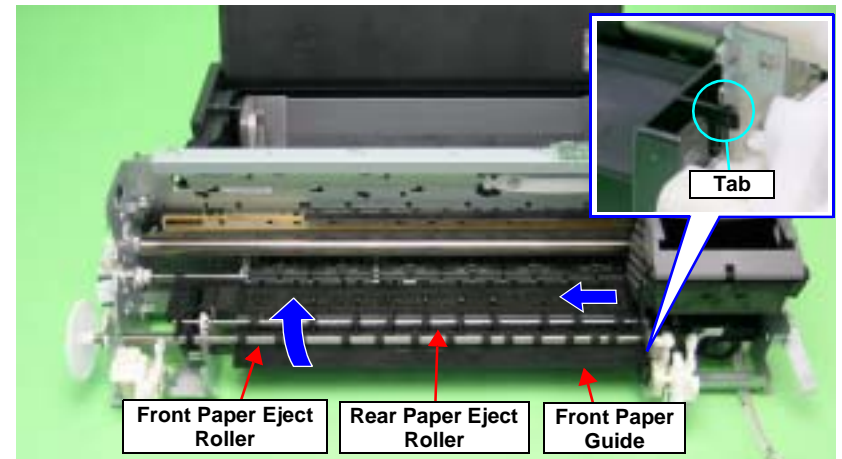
Removing the Front Paper Guide and Paper Eject Rollers
